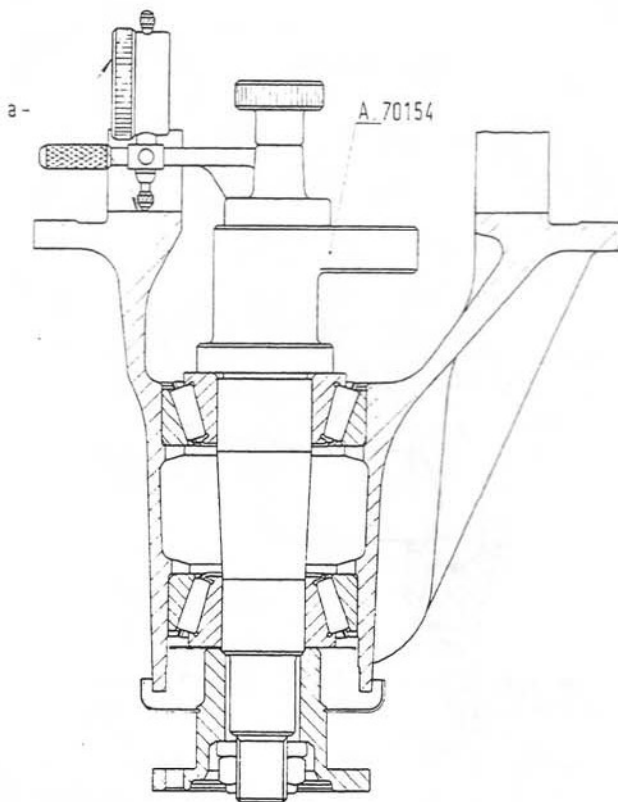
Diagrammatic view showing how dummy pinion A. 70154 and dial indicator should be fitted to determine drive pinion rear bearing thrust washer thickness.
